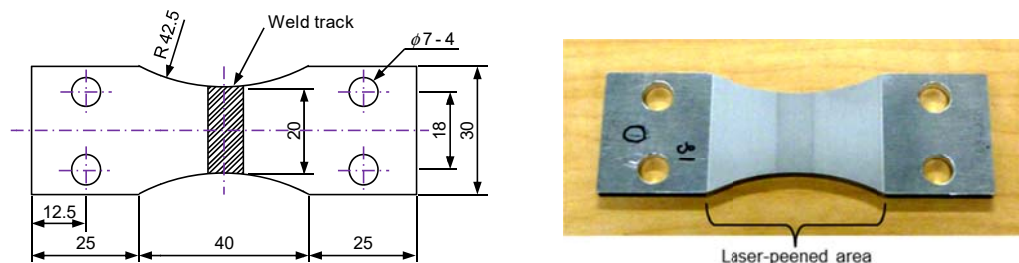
Shape and dimensions of specimen (left) and external view after laser peening (right).
